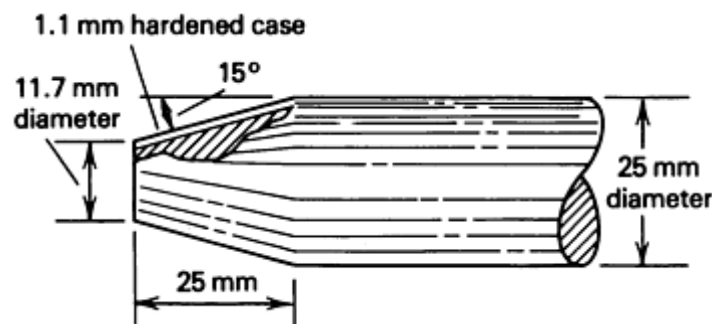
Laser hardening of conical SAE 4140 workpiece
